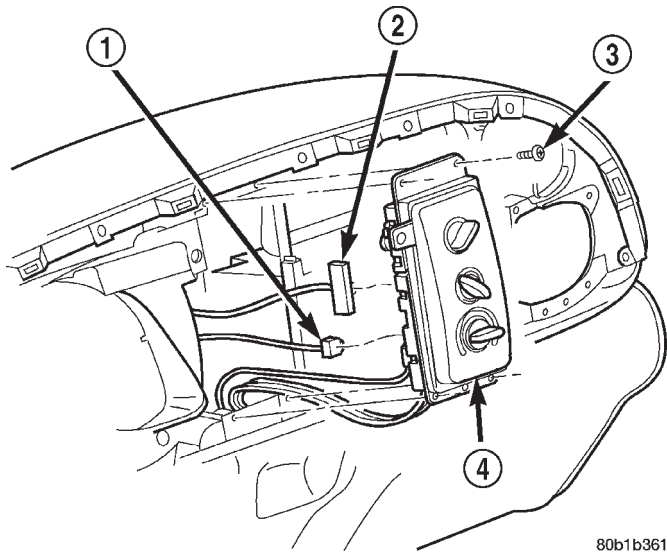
A/C HEATER CONTROL REMOVE/INSTALL
